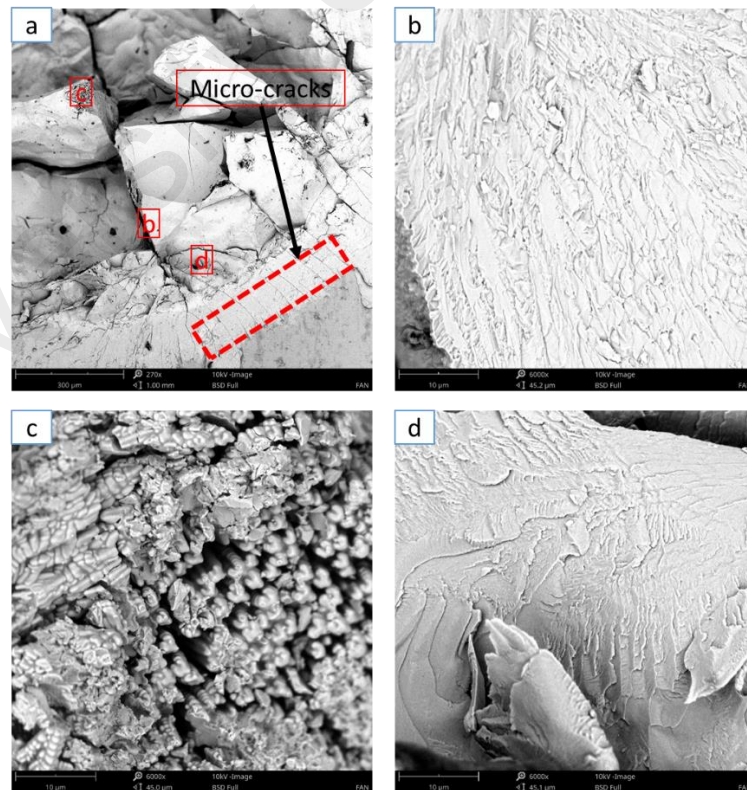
Fracture surface of Ti-6Al-4V side of the μ RSW joint
